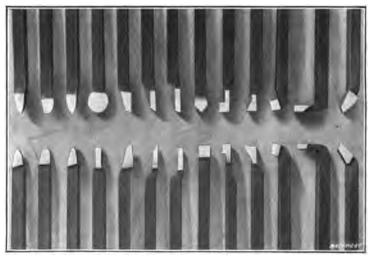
Set of Planer Tools ground on Sellers Tool-grinding Machine
